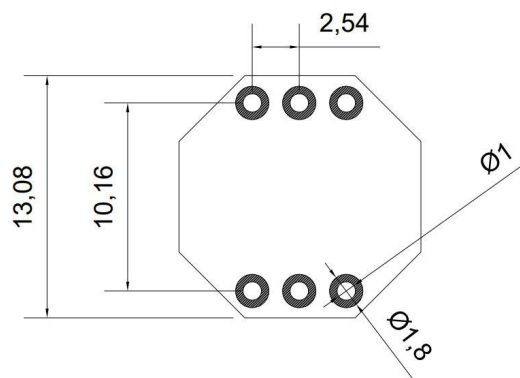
Outline Drawing(The unspecified tolerance is  $\pm 0.2\text{mm}$ ,unit:mm)
